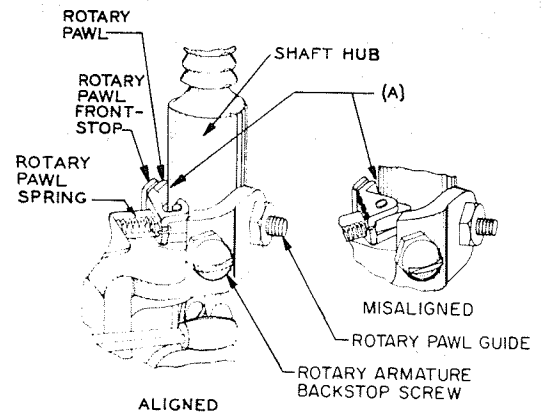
Illustrating Rotary Pawl Aligned and Misaligned With Cylindrical Part of Shaft Hub
